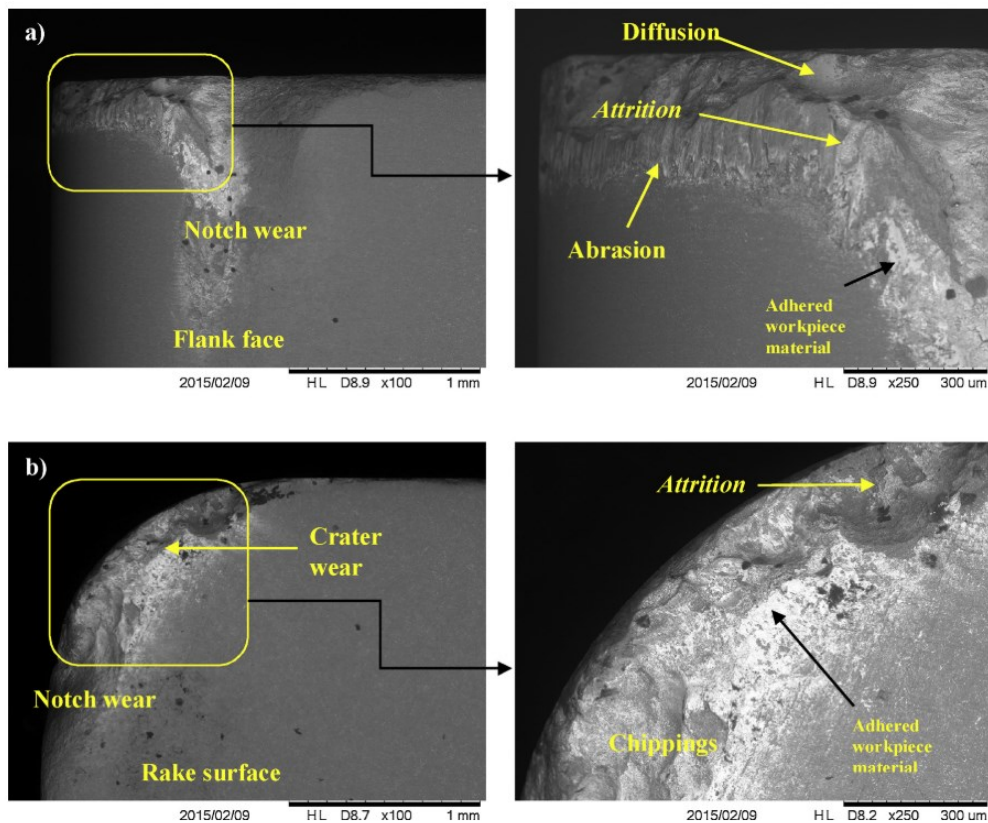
Pictures of the flank view (a) and rake view (b) of the damage experienced by a whisker-reinforced ceramic tool after machining Inconel 718 in dry machining (Marques et al., 2019).
